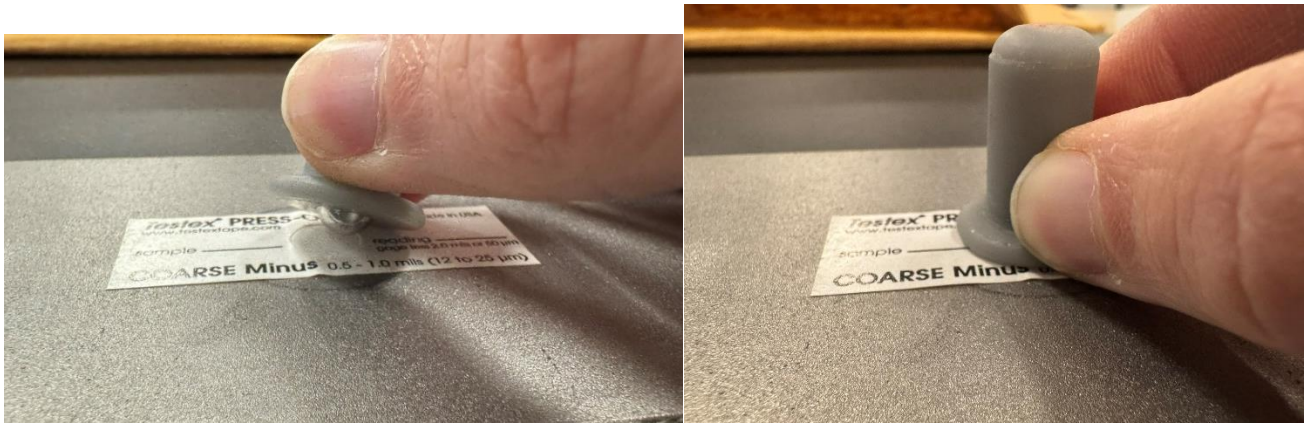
The revised precision burnishing tool being used to burnish replica tape
